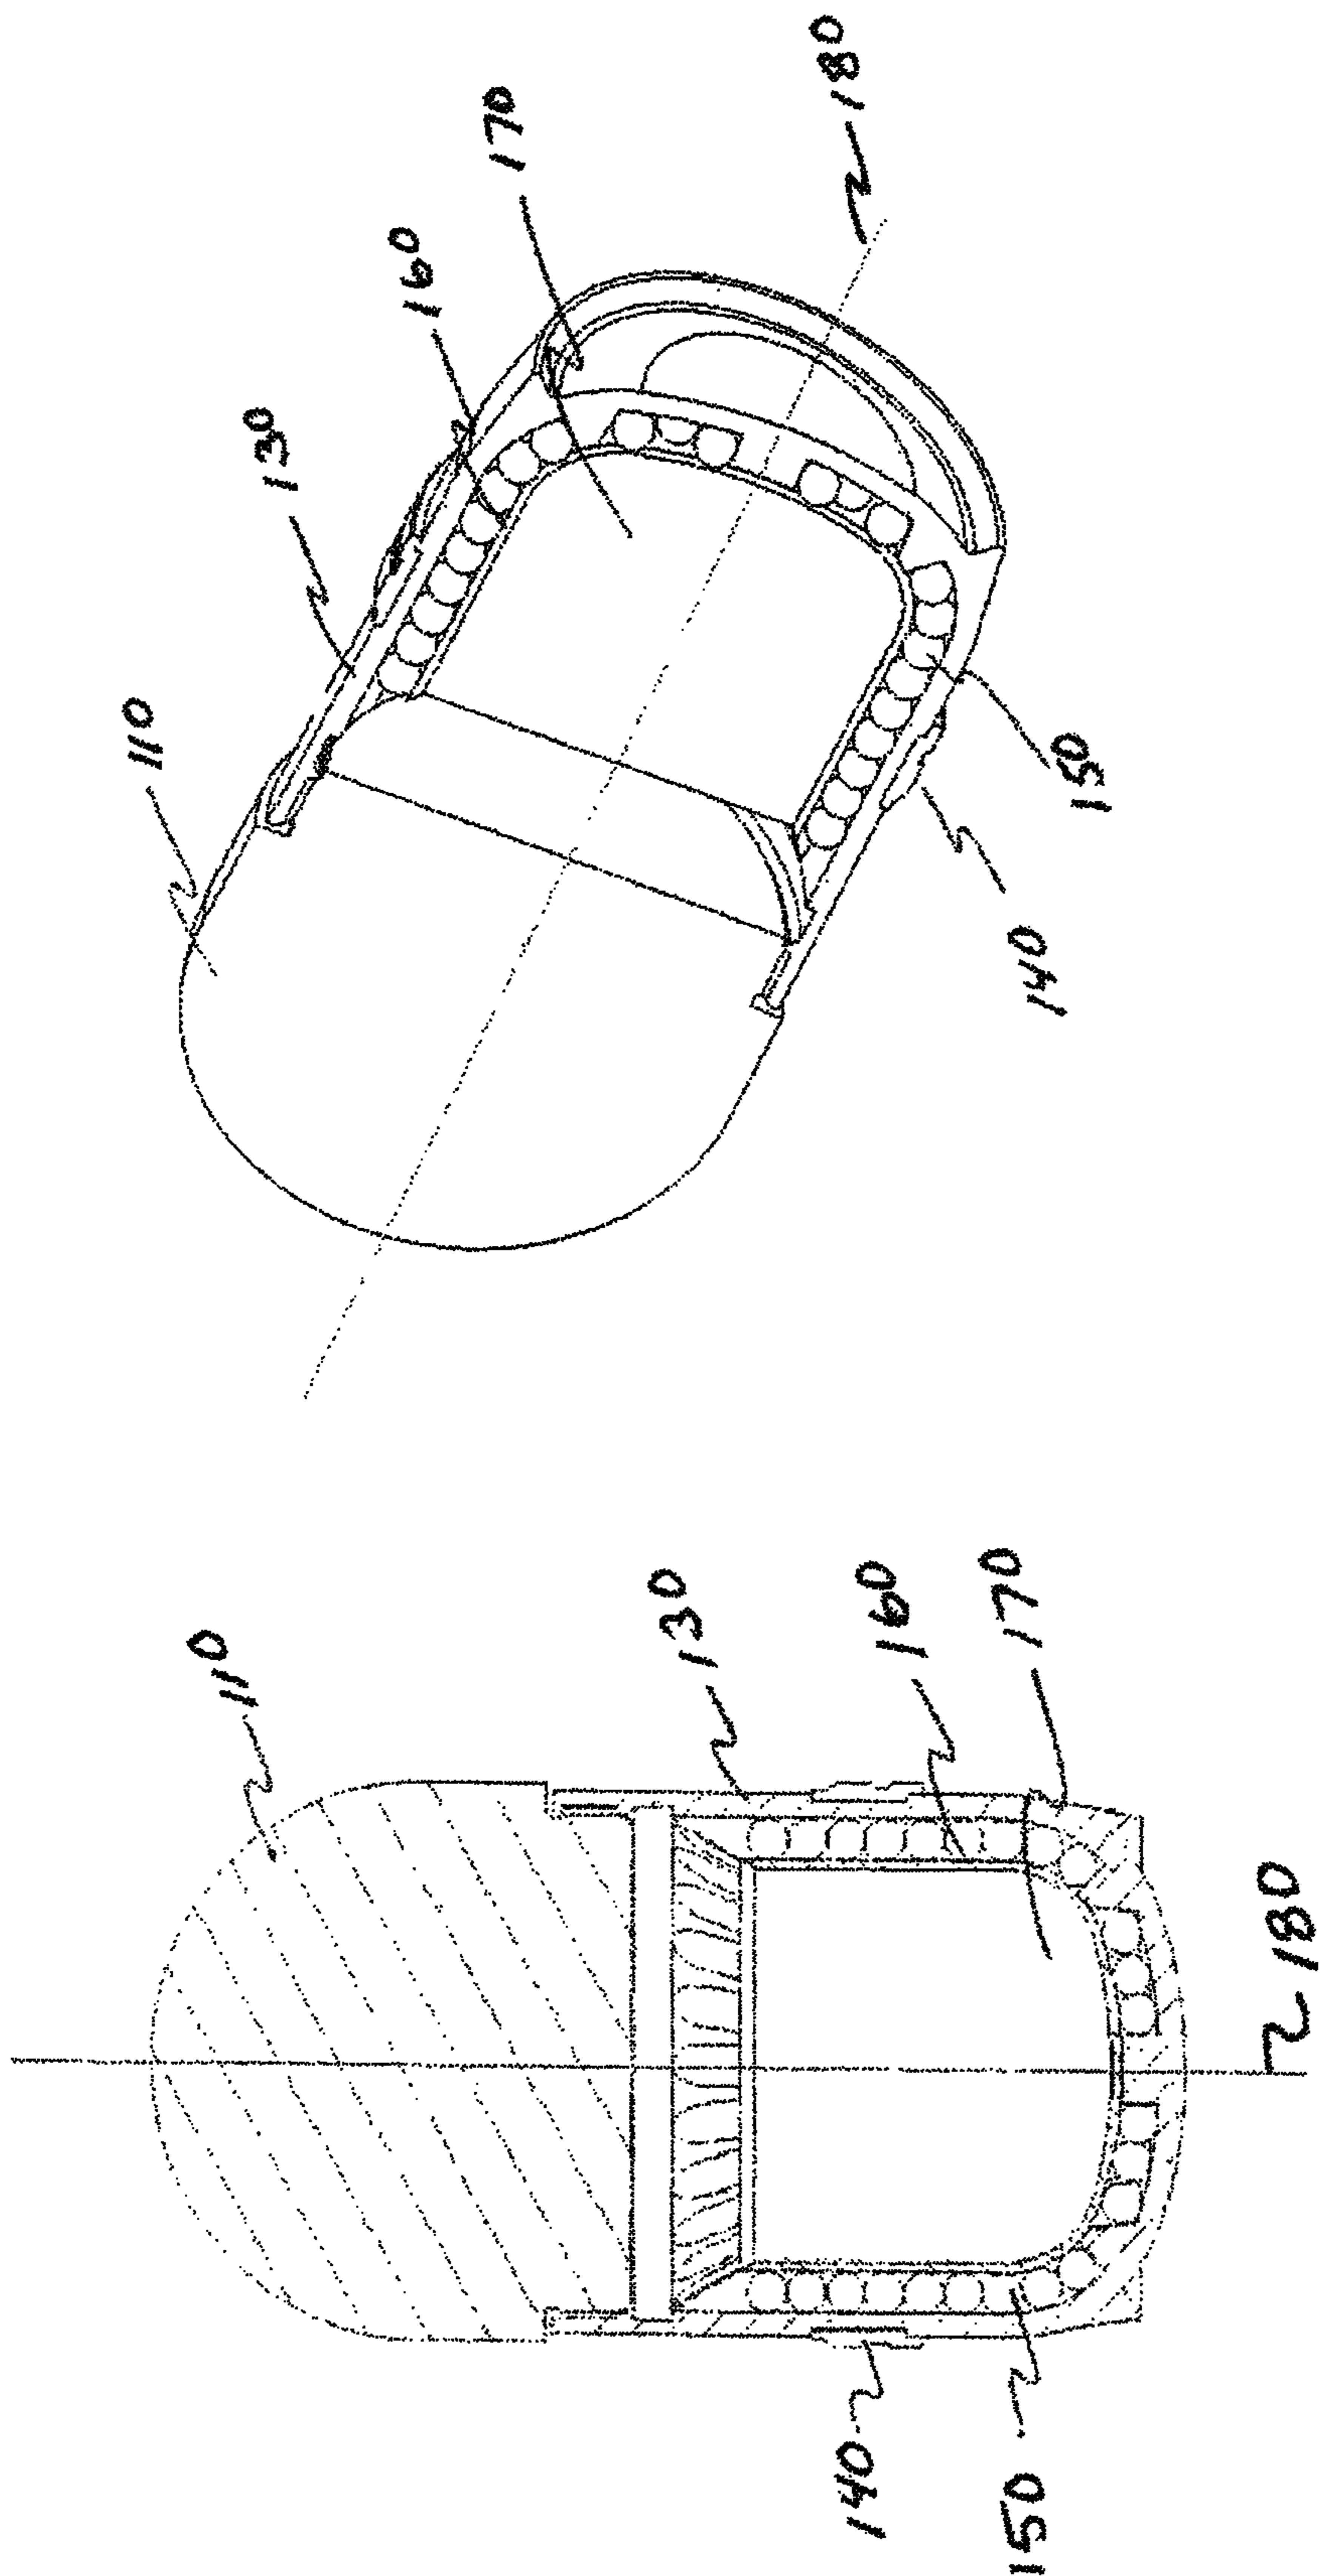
A – Cut Away Views 40mm Warhead (Assembly)
